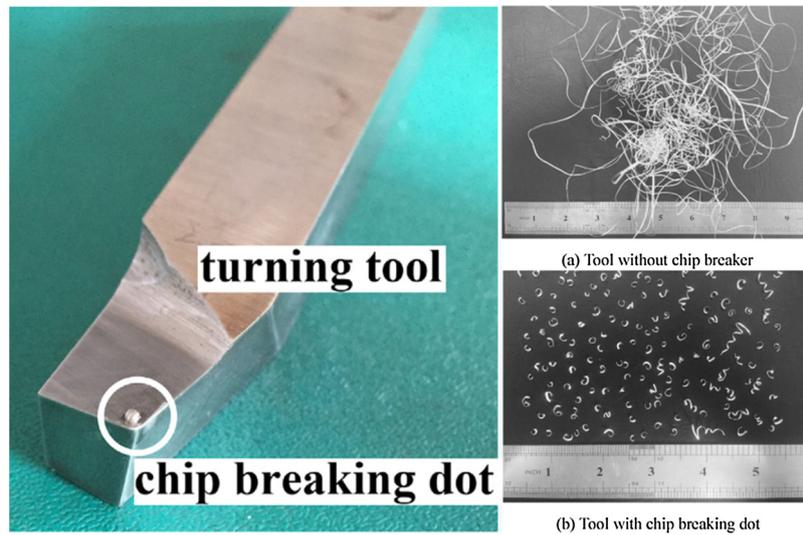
Chip breaking dot employed by an HSS tool and its effect on chip breaking [39].
